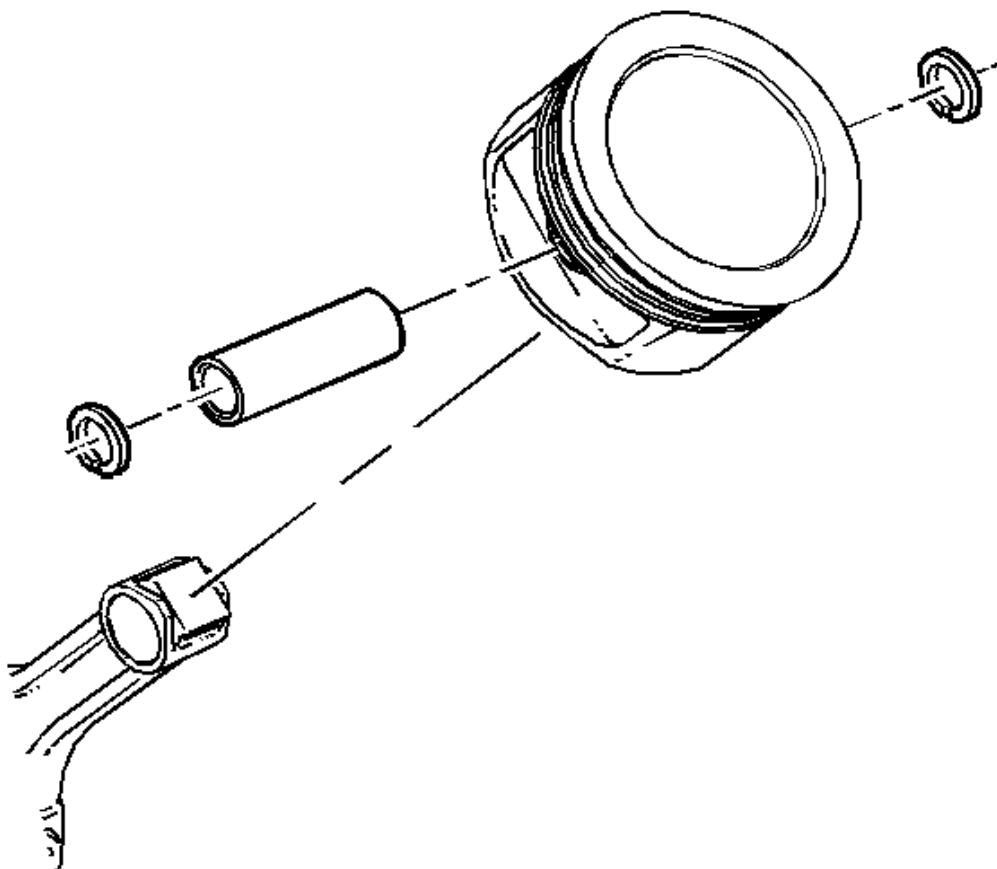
View Of Piston Pin, Piston, Clips & Connecting Rod
